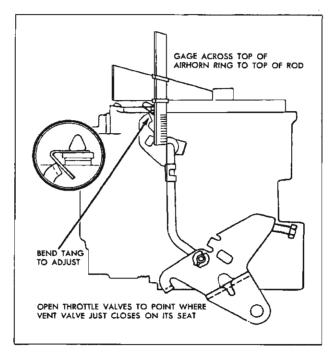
B-16 Idle Vent Valve Adjustment (Center Carburetor)
